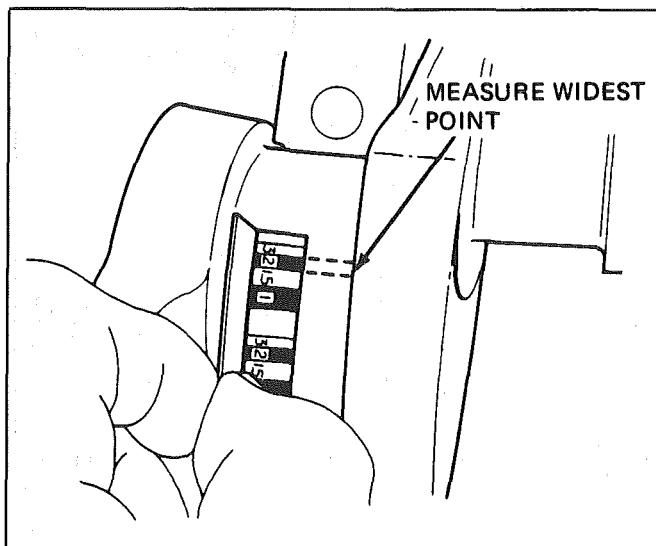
A3-40 Measuring Gaging Plastic-Typical
